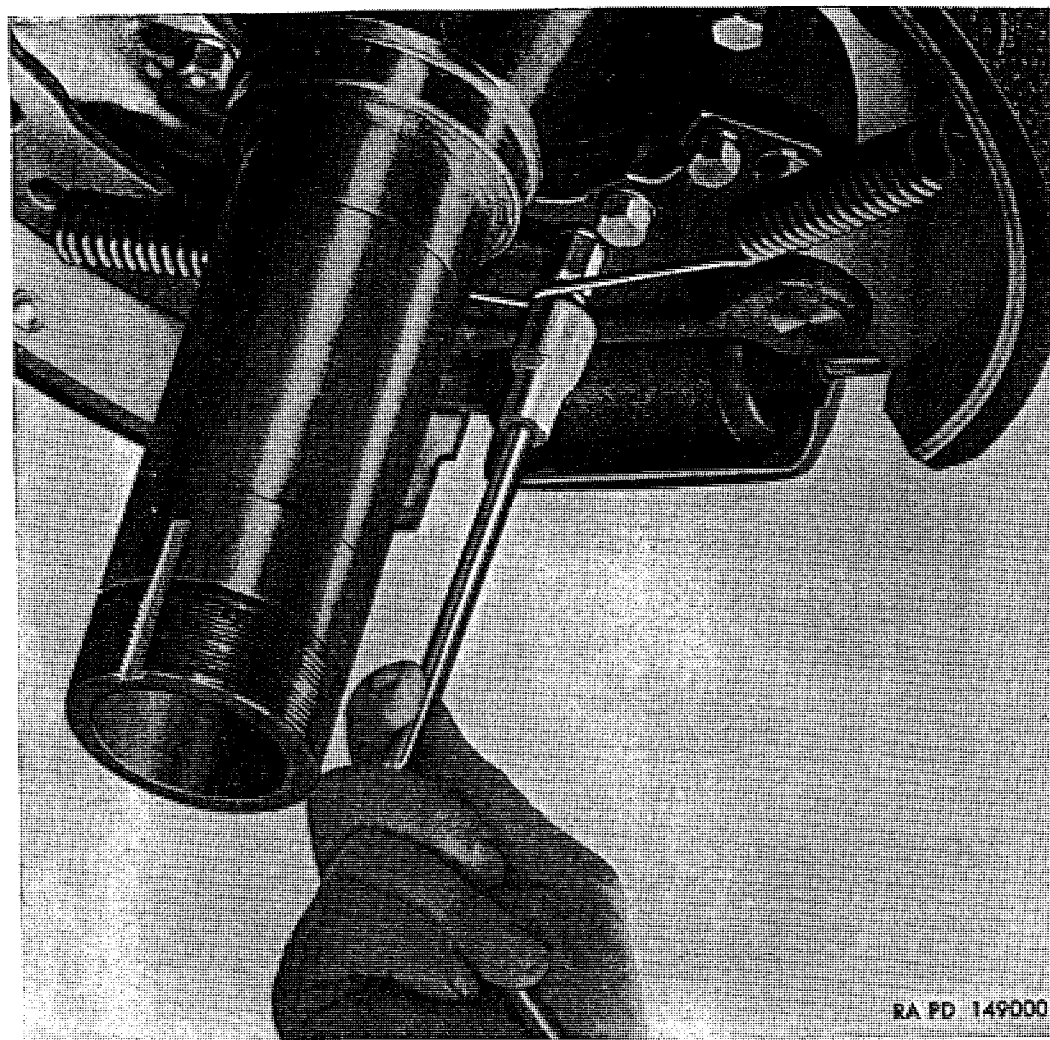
Removing brake shoe return springs, using remover and replacer B7950060.
